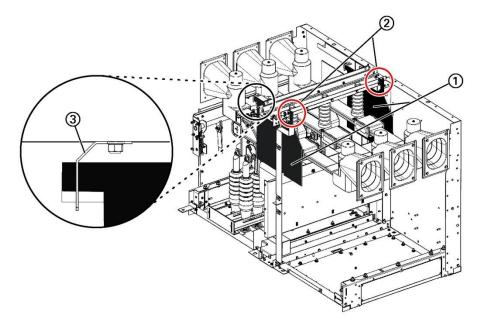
Mounting the lateral insulating plates, panel width 1000 mm
